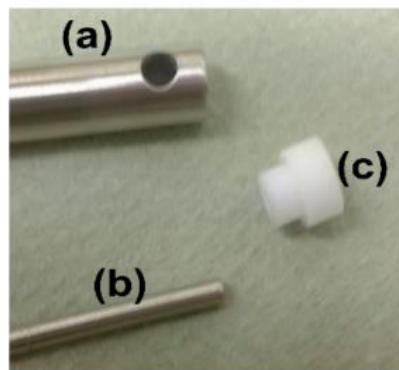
3. The parts of the vessel mould and assembly diagram.
